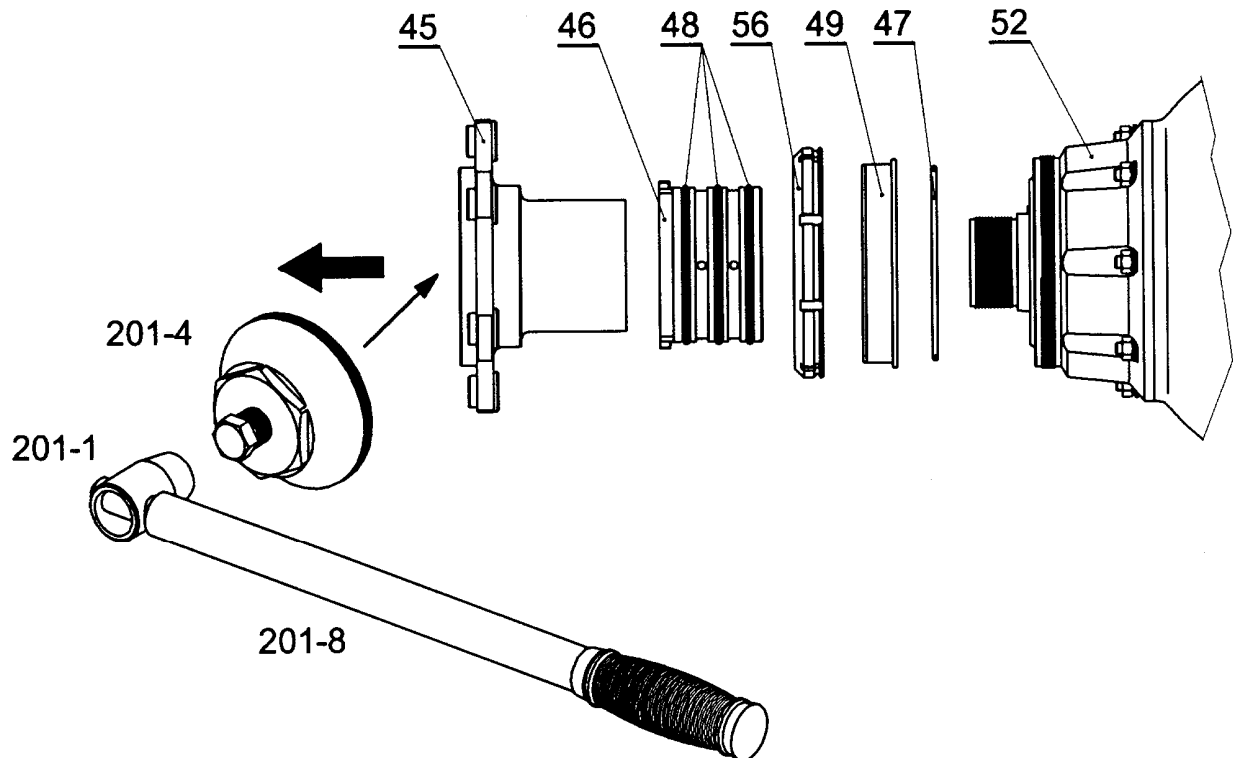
Flange and floating sleeve of LUN 7902 distributor removing
